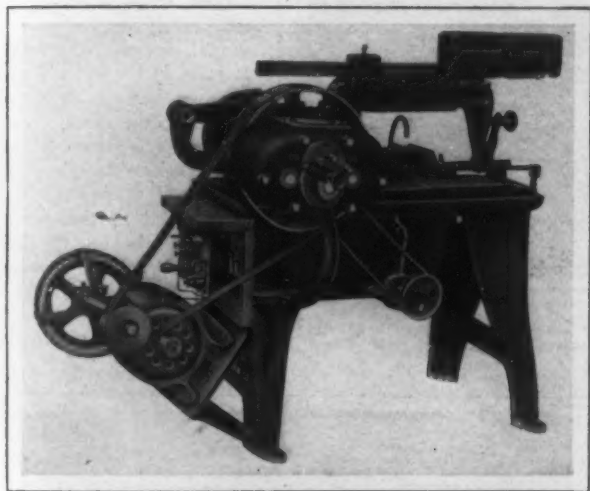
The No. 5 High-Speed Metal Cutting Machine Built by the Racine Tool & Machine Company, Racine Junction, Wis.
